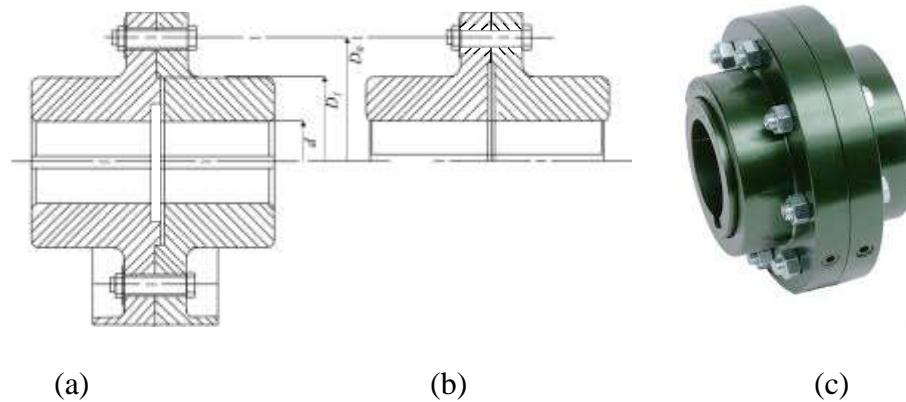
Rigid couplings of bolted flanges, alignment by shouldered cylinders (a) and alignment by shouldered bolts (b). (c) shows an assembled set (from internet)
